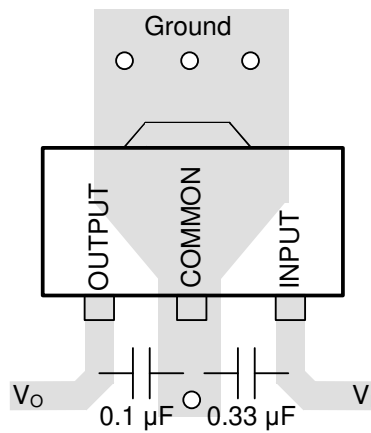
LM78Lxx Example Circuit Layout, SOT-89 Package
